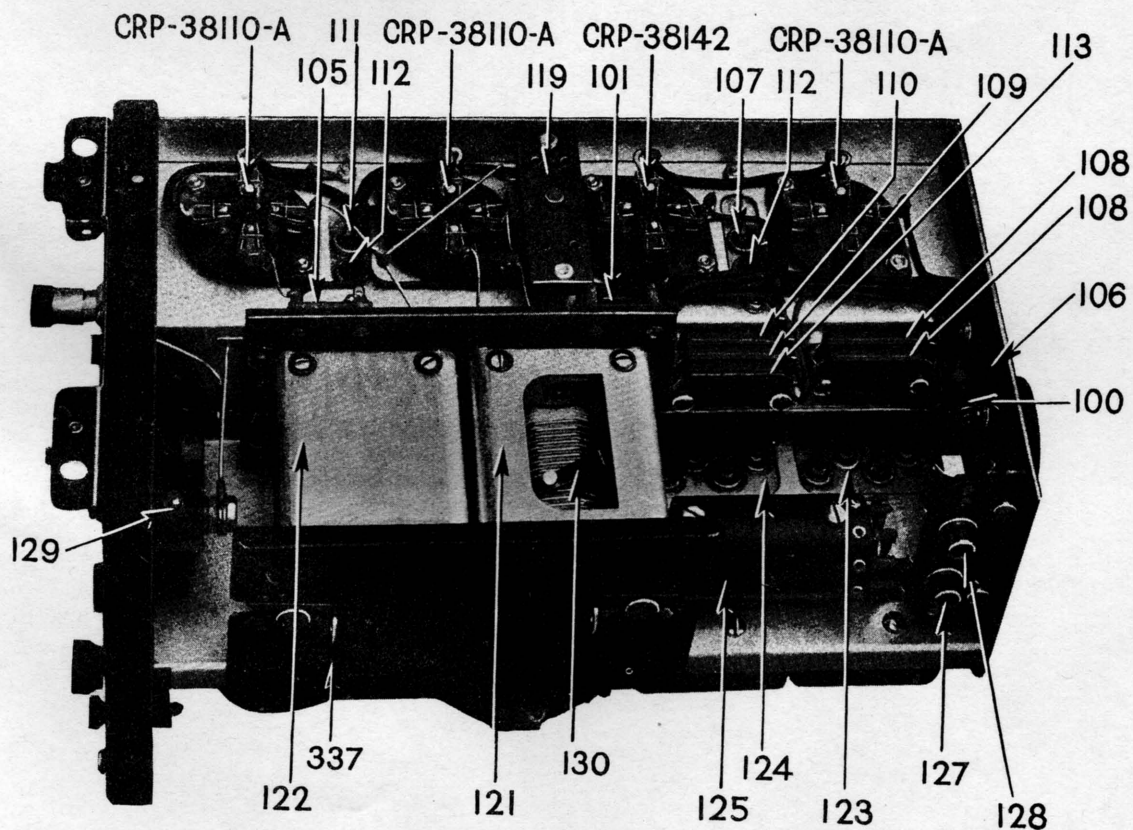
A -TYPE CBY-52027 TRANSMITTER, BOTTOM VIEW
